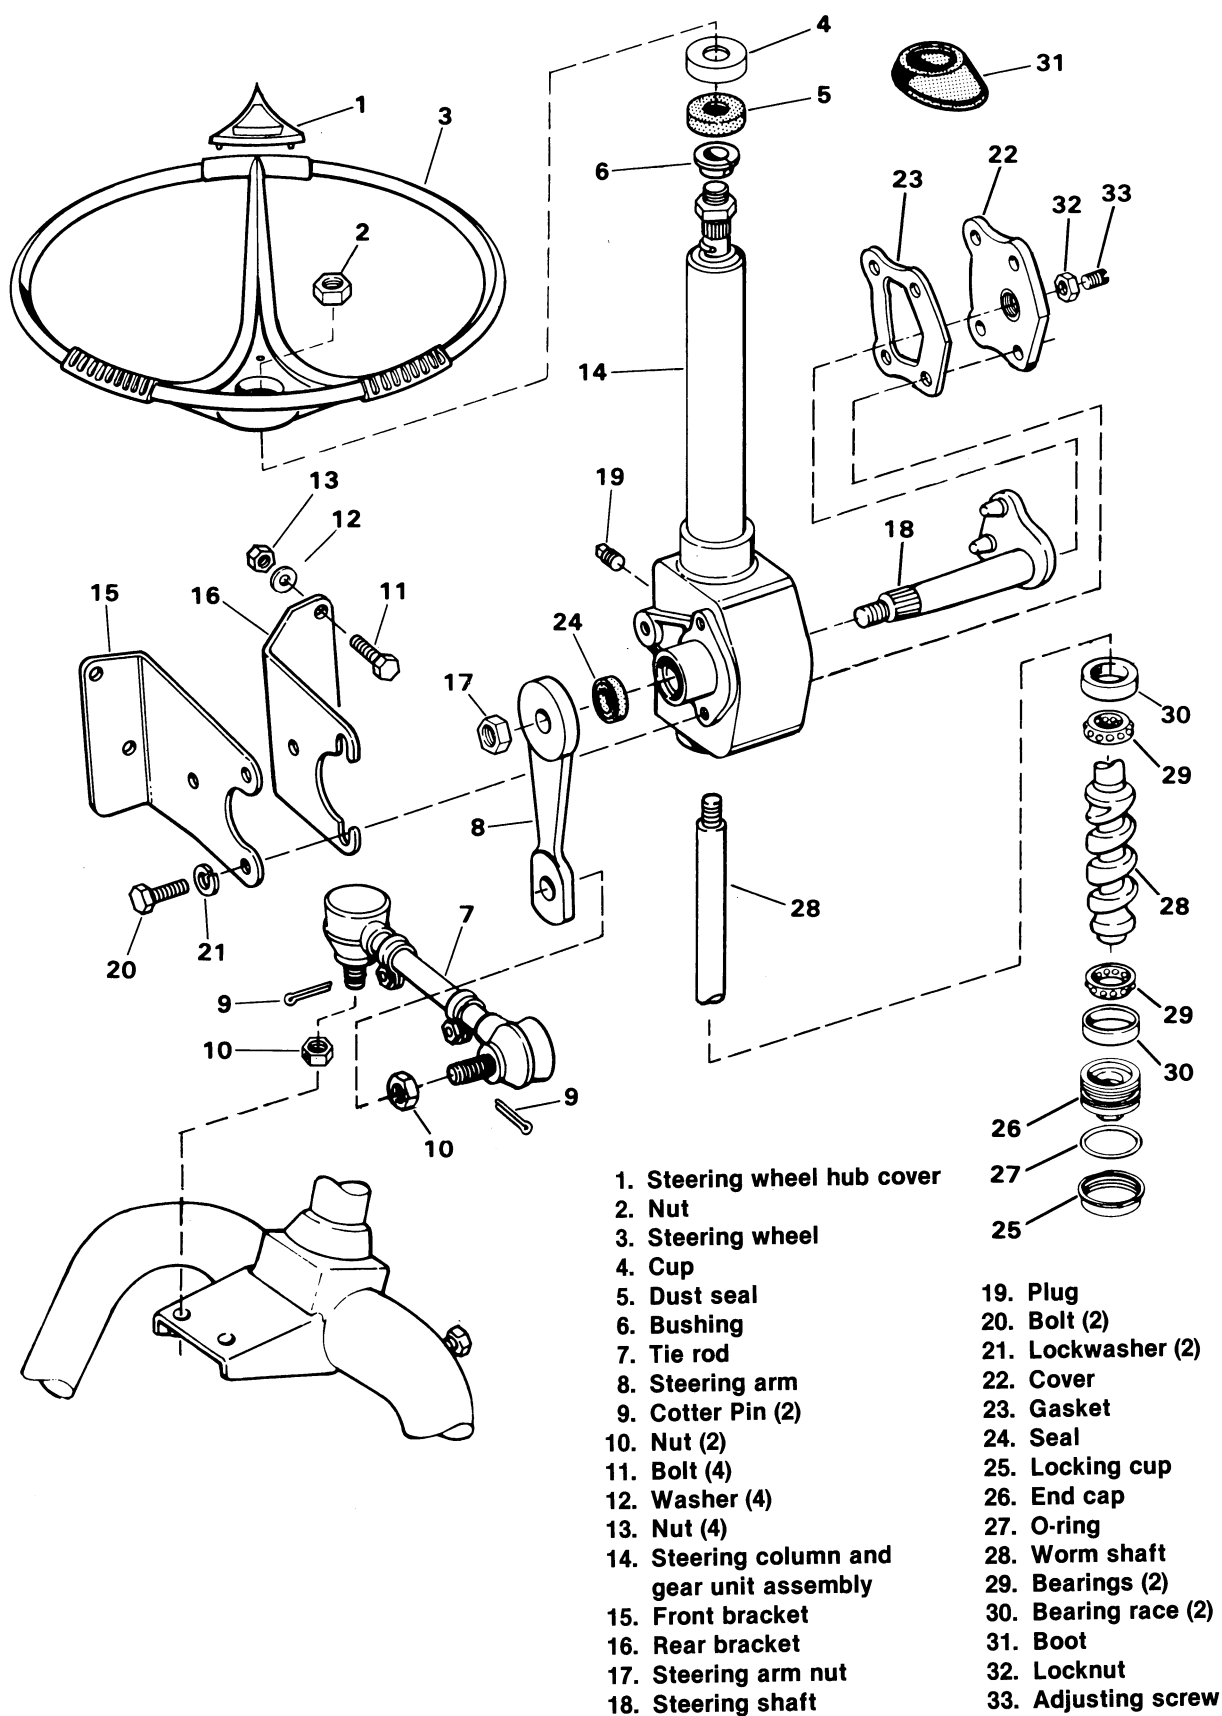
Steering Wheel and Steering Gear Unit — Exploded View
